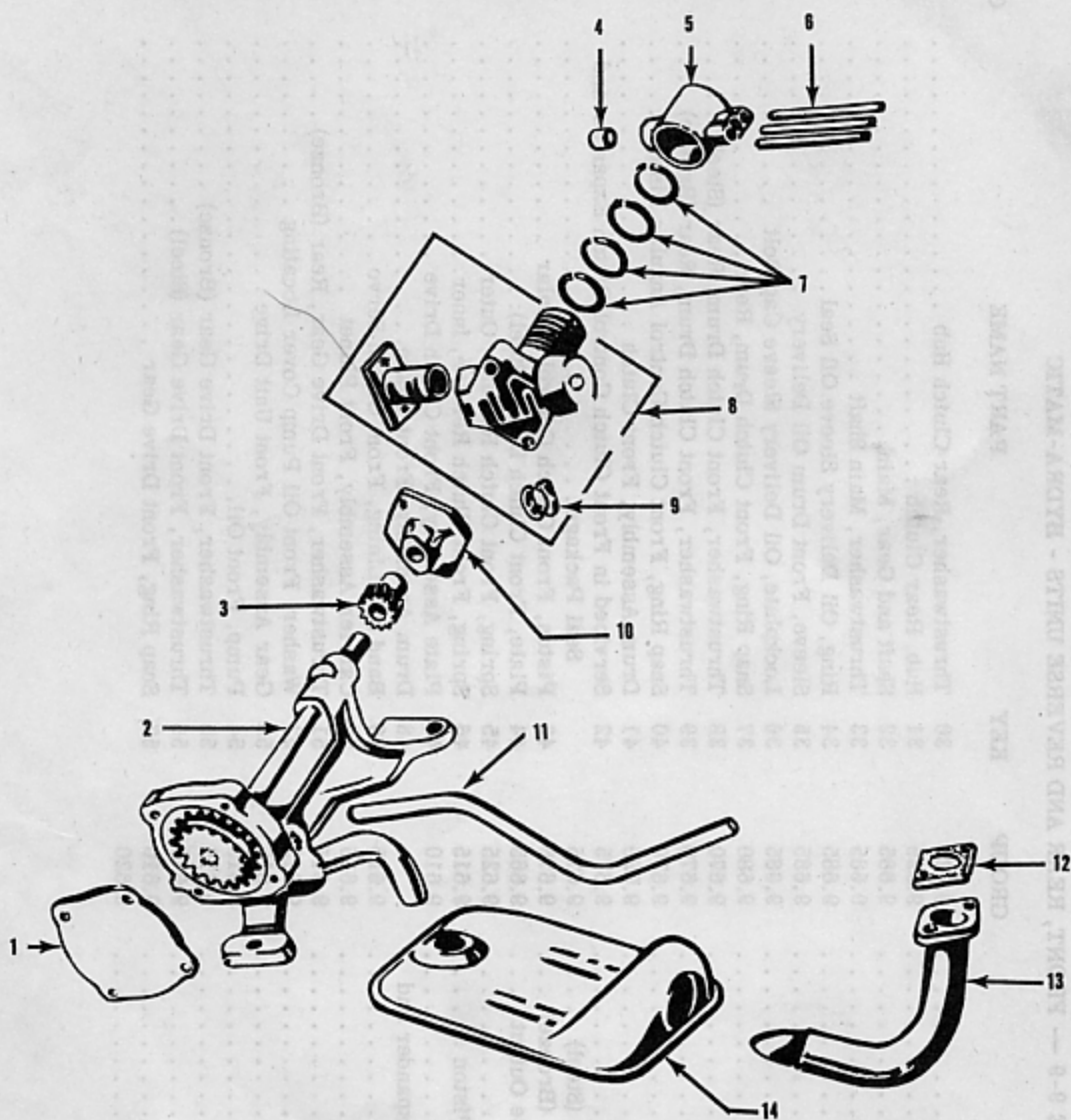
REAR OIL PUMP AND GOVERNOR - HYDRA-MATIC
